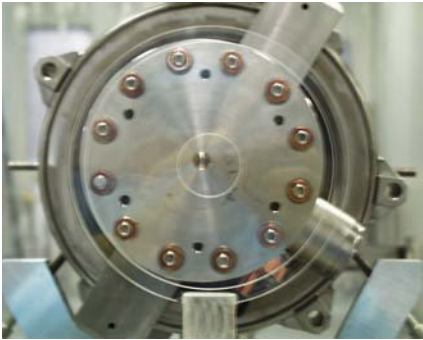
Alignment of beam pipe flange to the beam axis
